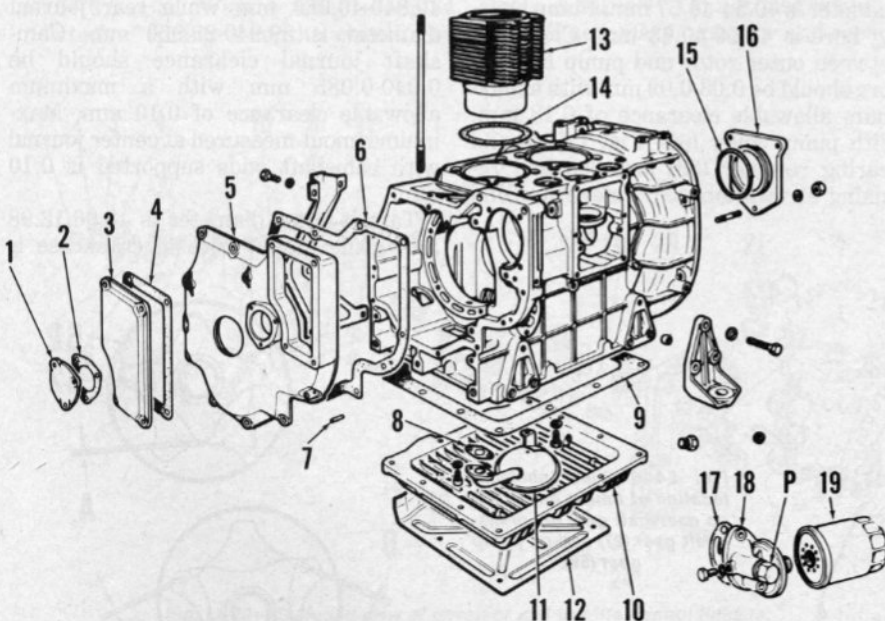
Exploded view of crankcase assembly. Remove plug (P) for access to oil pressure relief valve.
